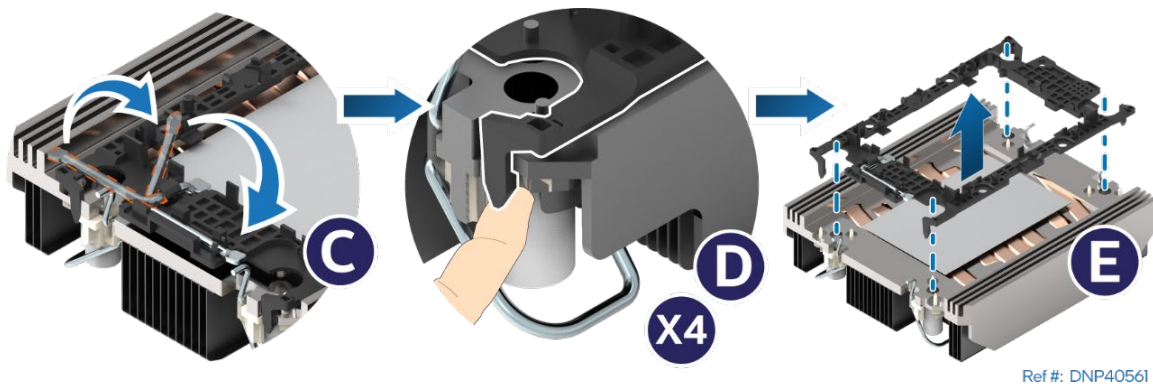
Processor Carrier Clip Removal from PHM Assembly
